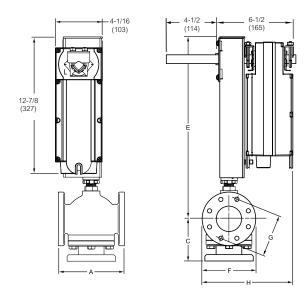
Mx41-634x with 6" Flanged 3-Way Globe Valves
